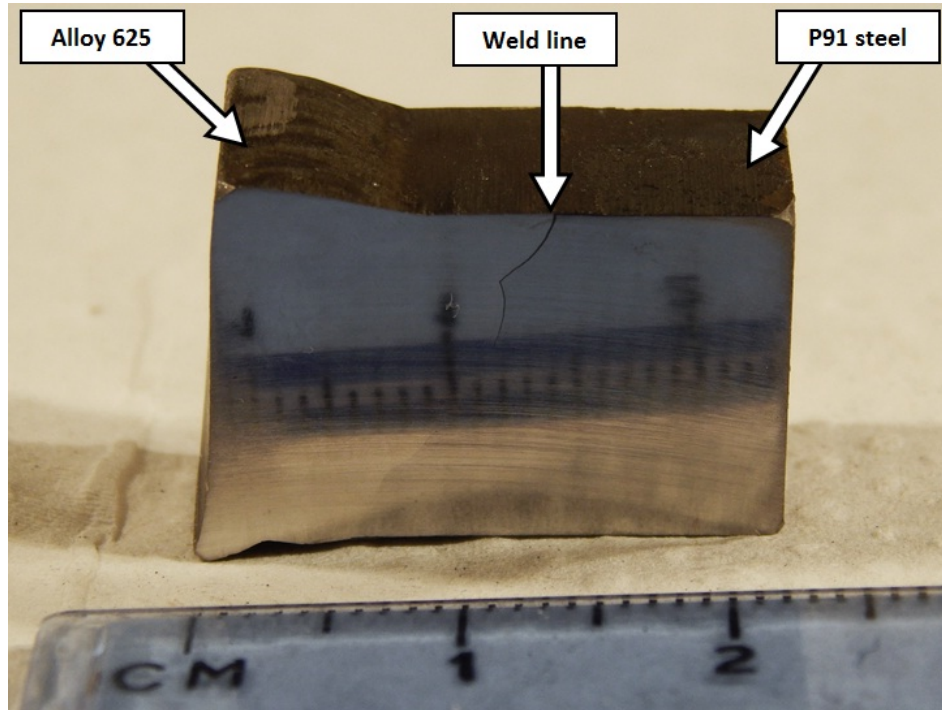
A section of one of the P91 – Alloy 625 ex-service weld samples (specifically sample ‘FP-C’). The cracking at the weld line can be seen in the top half of the sample as a dark line.
